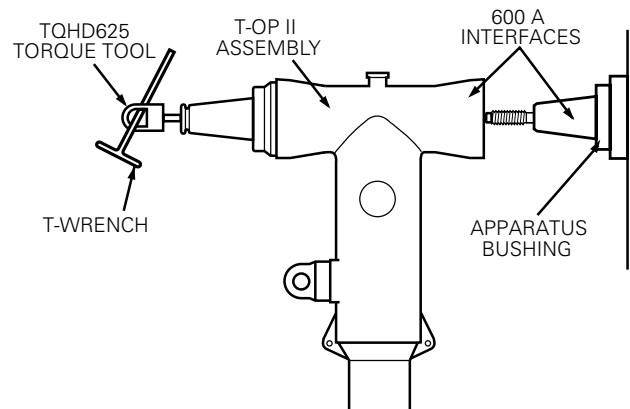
Installing the T-OP II assembly onto the apparatus bushing
